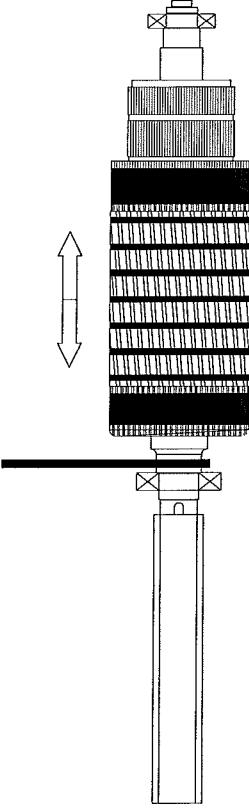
Removing the rotor for motors of little and medium size (suggested for H 80 ÷ H 180)
